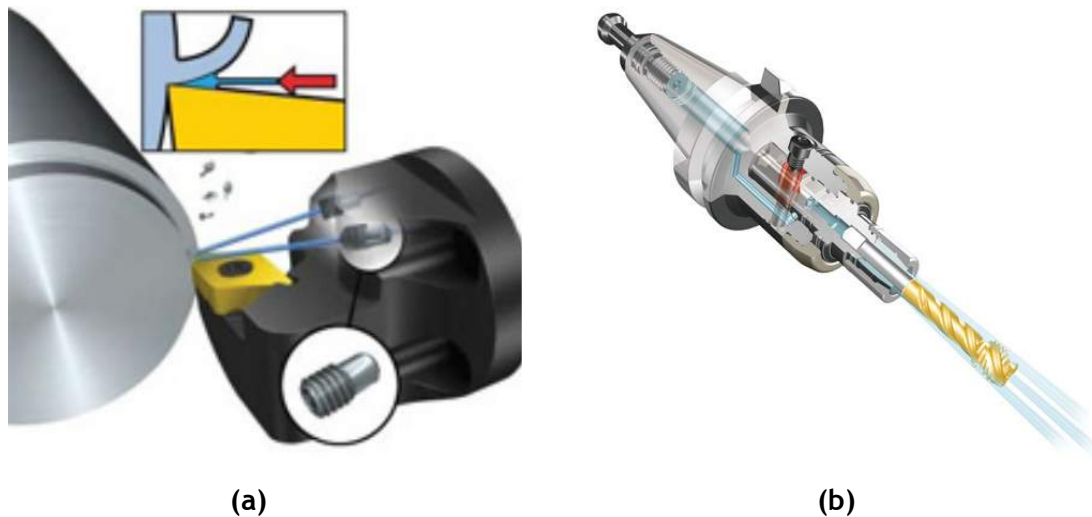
(a) CoroTurn HP - HPSTC system delivers coolant directly onto the cutting edge. (b) HPSTC application for Hyundai's WIA drilling tool body.
